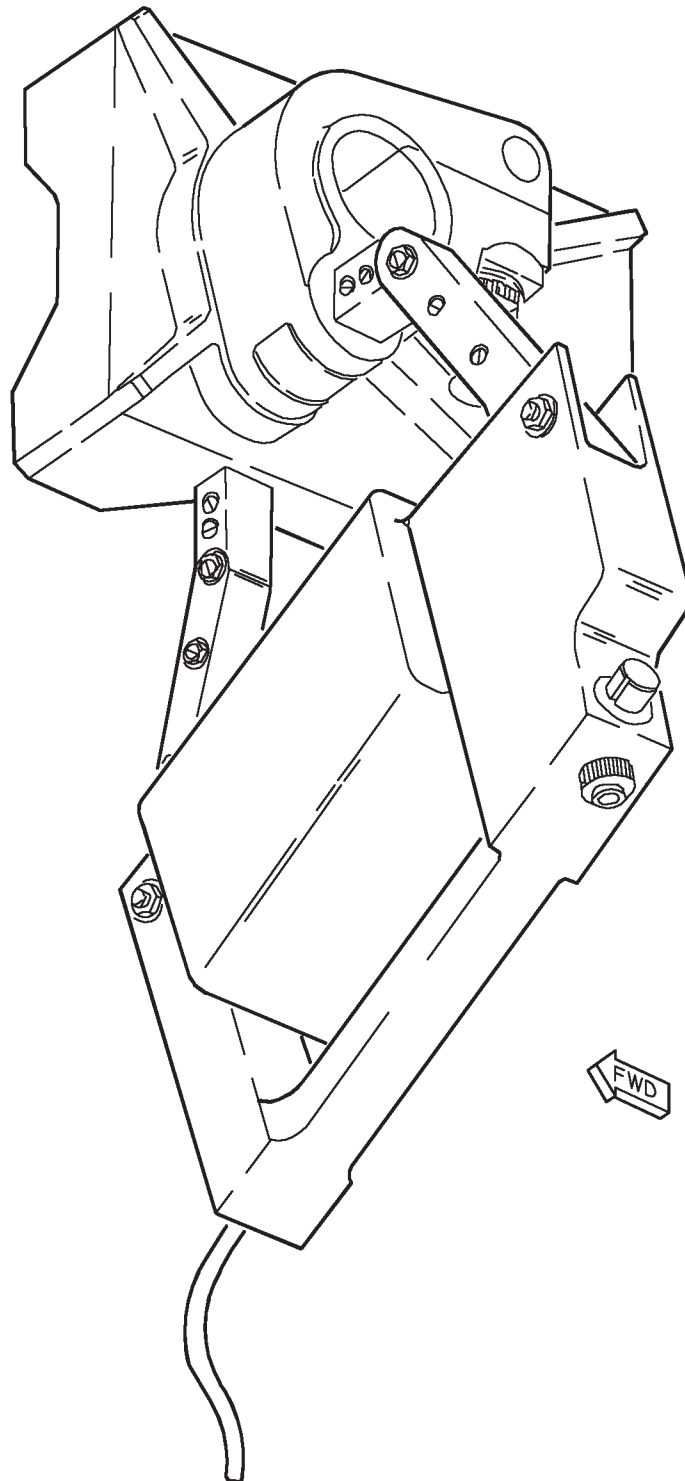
Engine Mount Inspection Areas and Flaw Locations
